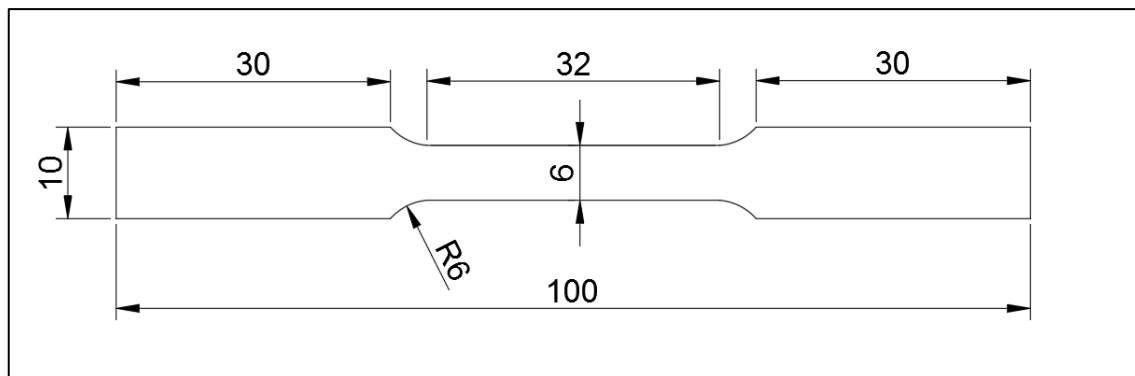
Tensile testing specimen as per ASTM-E8M standard
